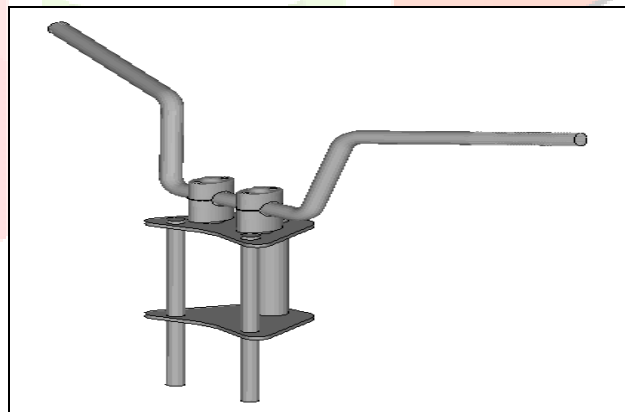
DRAFTING OF HANDLE BAR ASSEMBLY
